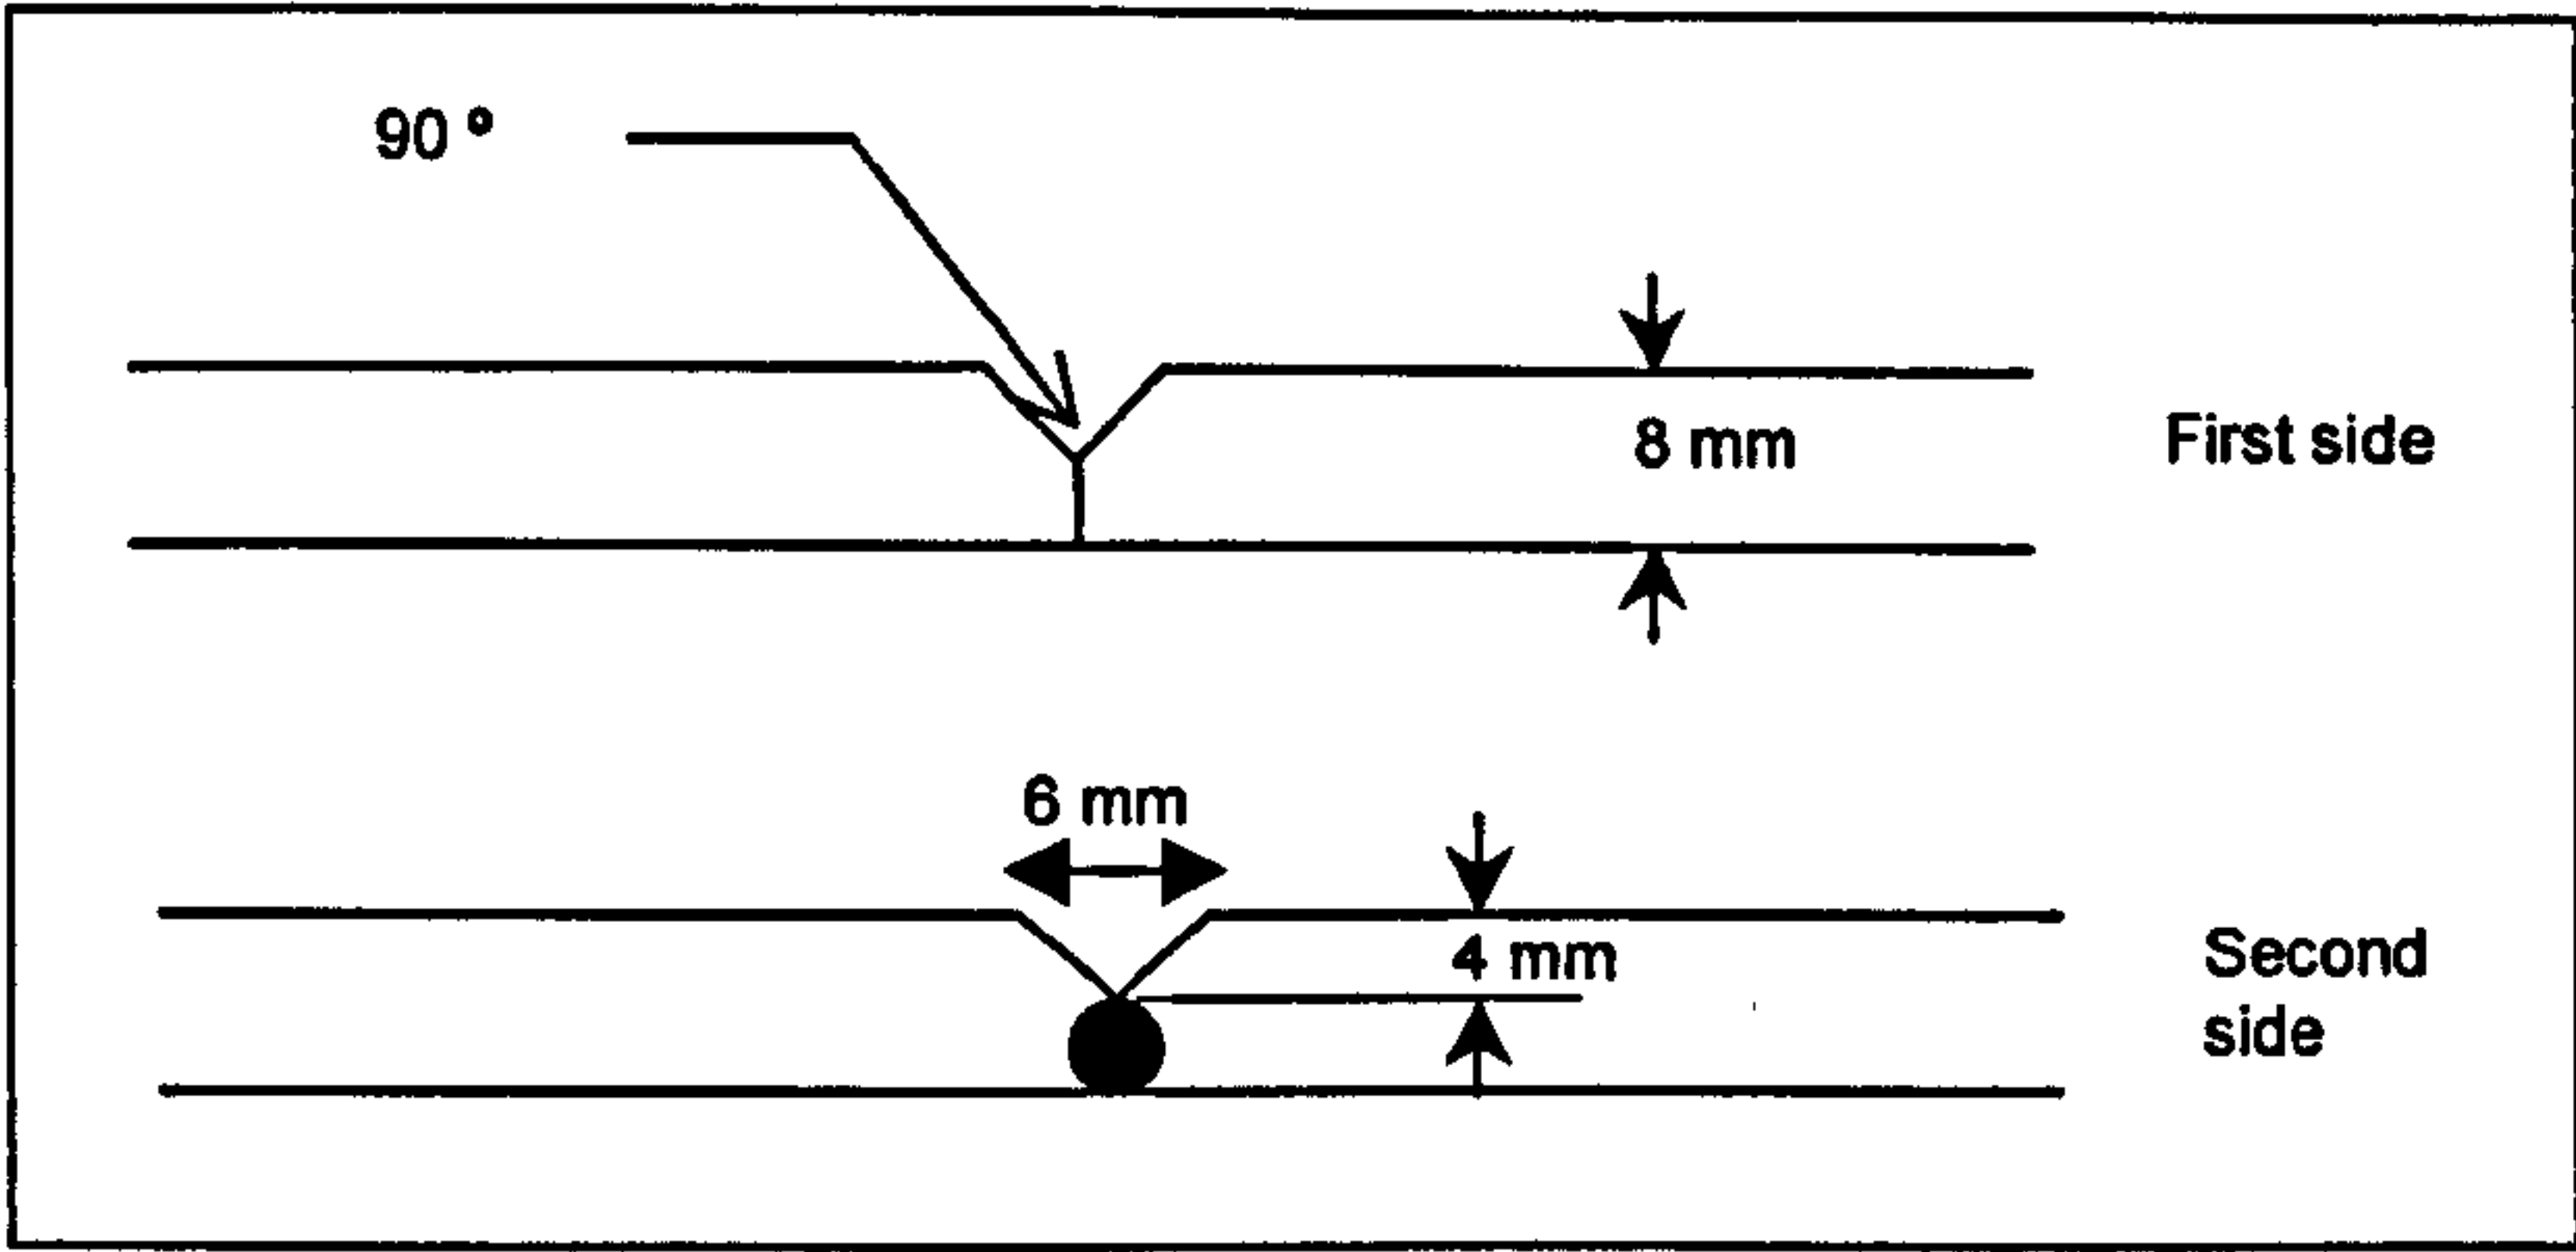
MIG LI back gouging prior to welding¹.
